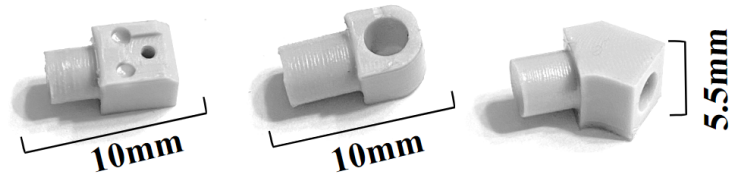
Actual Manufactured PEEK Parts (Interface Connector Omitted)
